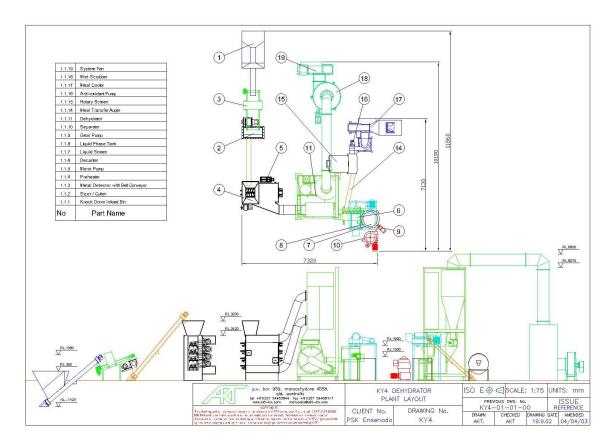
Plan and elevation of a packed small scale rendering plant.
